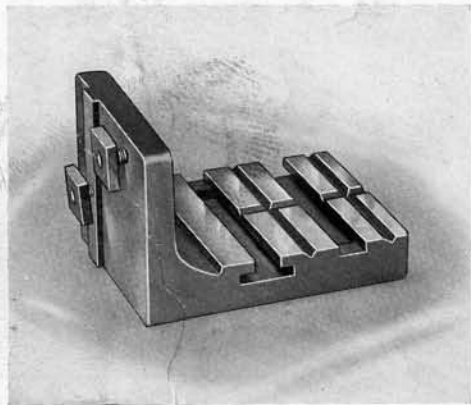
Angle Iron. Used on rocker tool post slide rest and slotted face plate for milling, etc. Length 4¼"; width 3¼"; height 3". T slots uniform with slide rest and face plate
